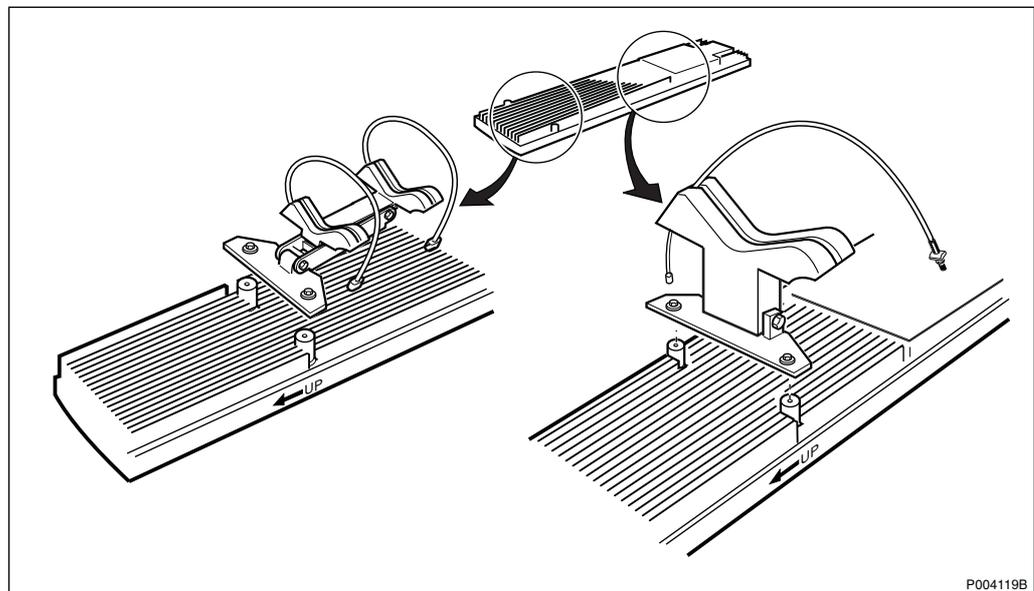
Attaching the upper and lower mounting fixture to the antenna (500 W EIRP)
